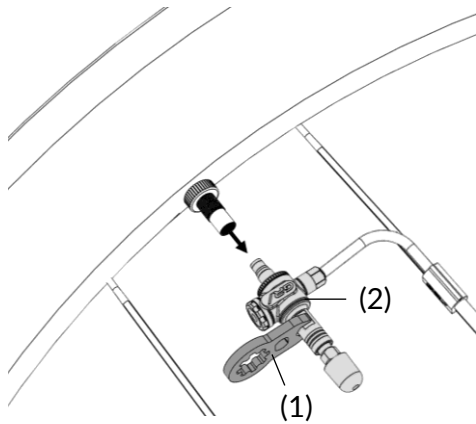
Remove the GRAVAA valve adapter from the valve stem
